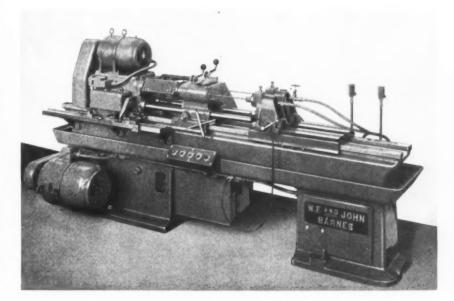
Two-spindle Rifle Drilling Machine Manufactured by W. F. & John Barnes Co.
